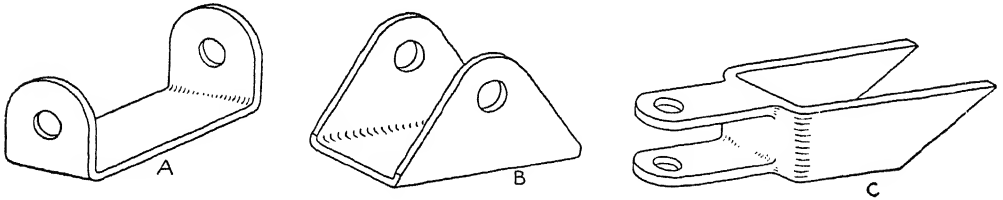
Probs. 6-41, 6-42, 6-43. Probs. 11-50, 11-51, 11-52.
